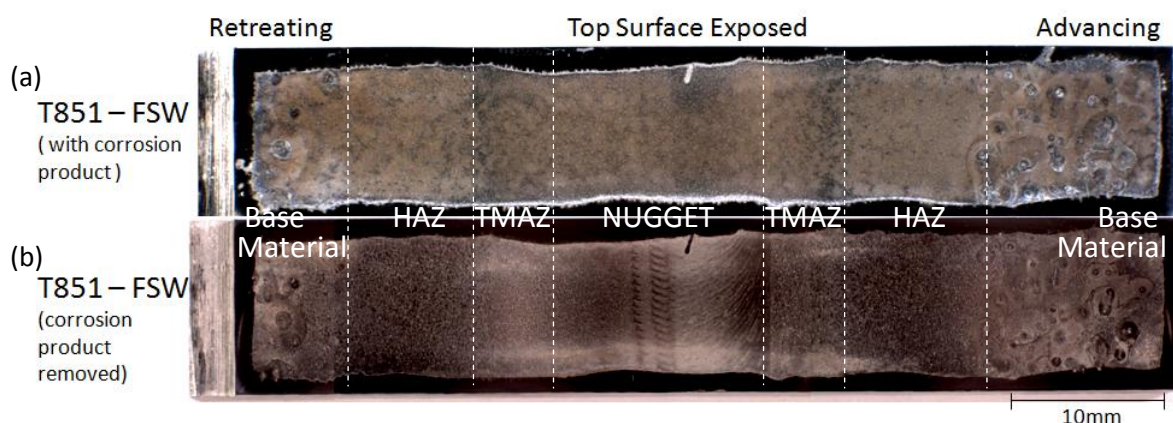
Optical macrograph images showing the top surface of the FSW specimen following 10 day 0.1M NaCl immersion test with, (a) the corrosion product on the surface, and (b) the corrosion product remove via gentle polishing
